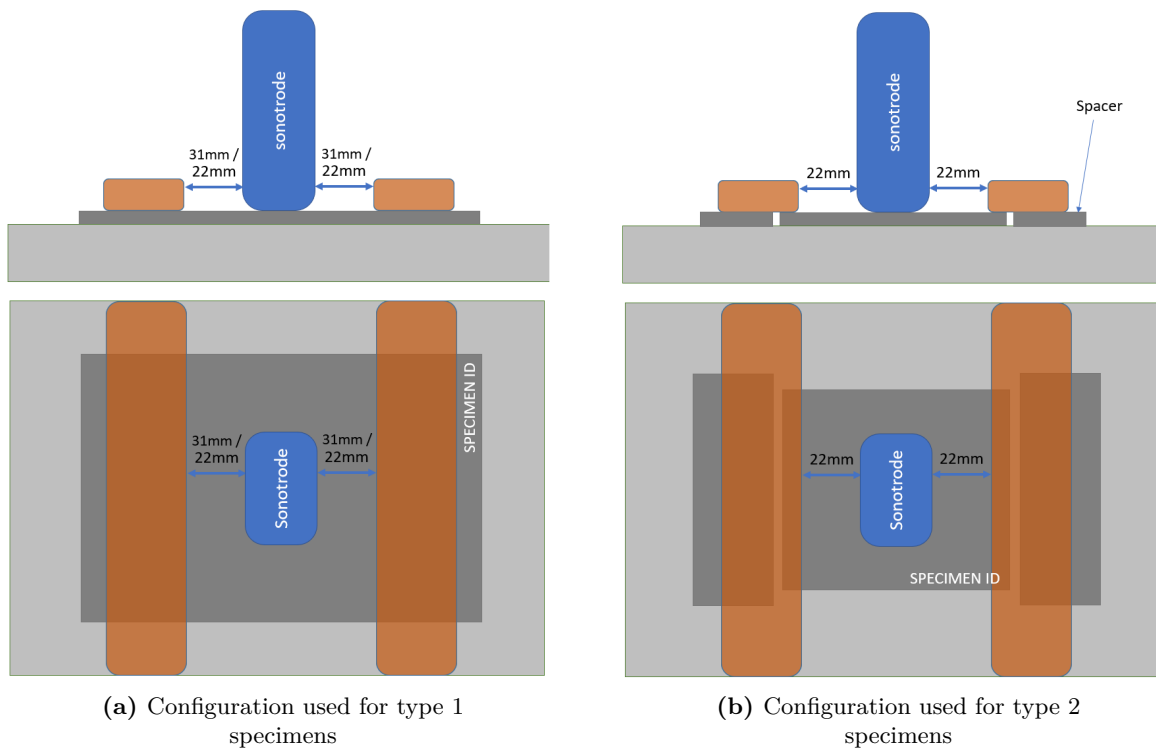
Clamping configurations used for ultrasonic welding. Top row shows a front view and bottom row shows a top view of the clamping configurations.
